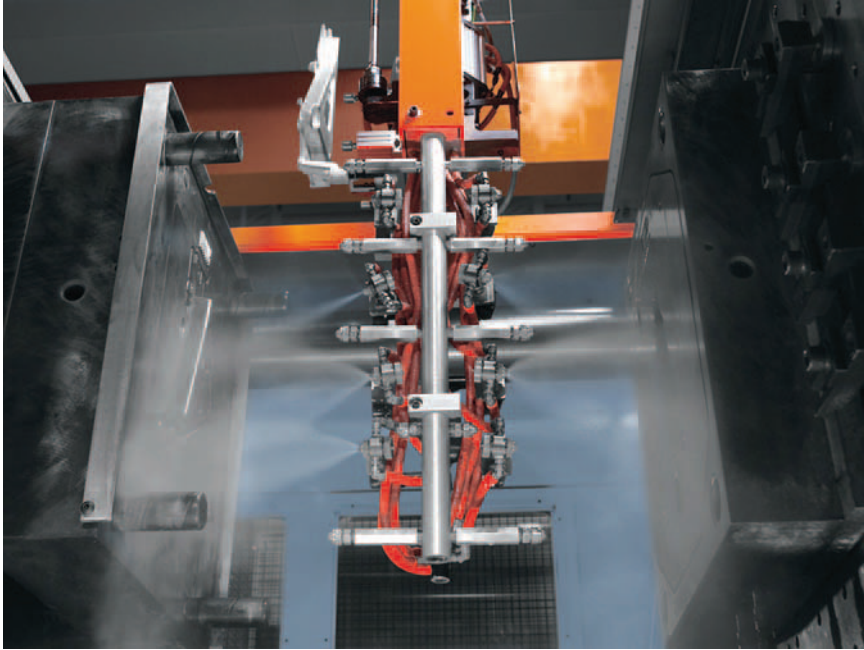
The spray head for mold lubricant distribution during magnesium molding
